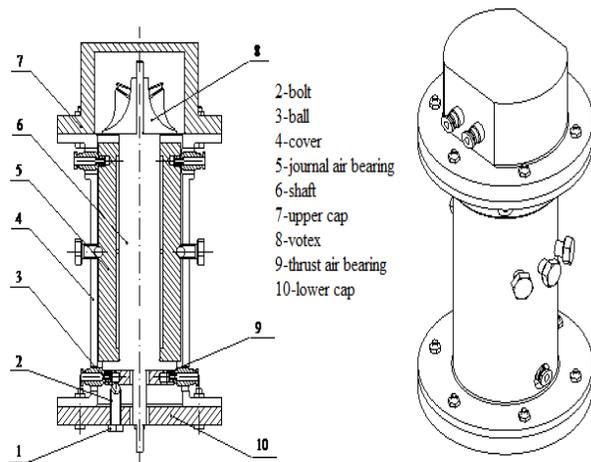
Study model of an air bearing spindle in small hole drilling machines.
